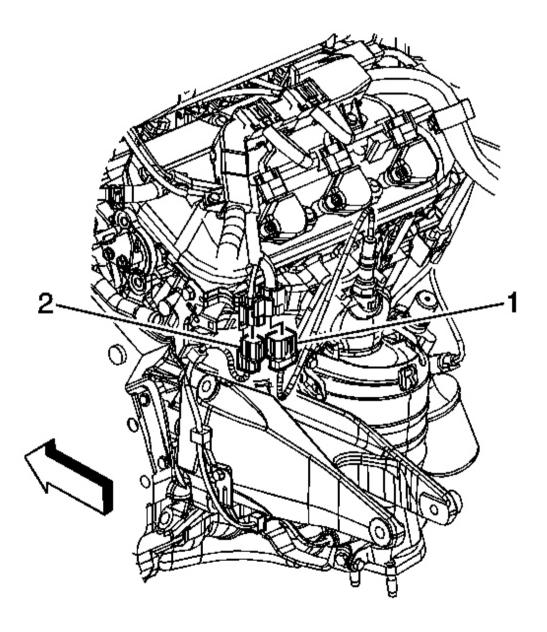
View Of Heated Oxygen Sensor (HO2S)
